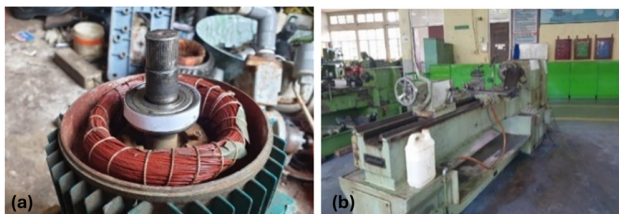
Bearing modification process: (a) inserting the insulated bearing into the housing and (b) lathe used for precision machining of the bearing housing.
